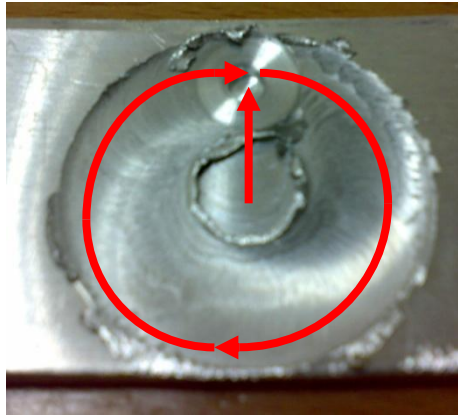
The red arrow shows the tip of the welding tool path
